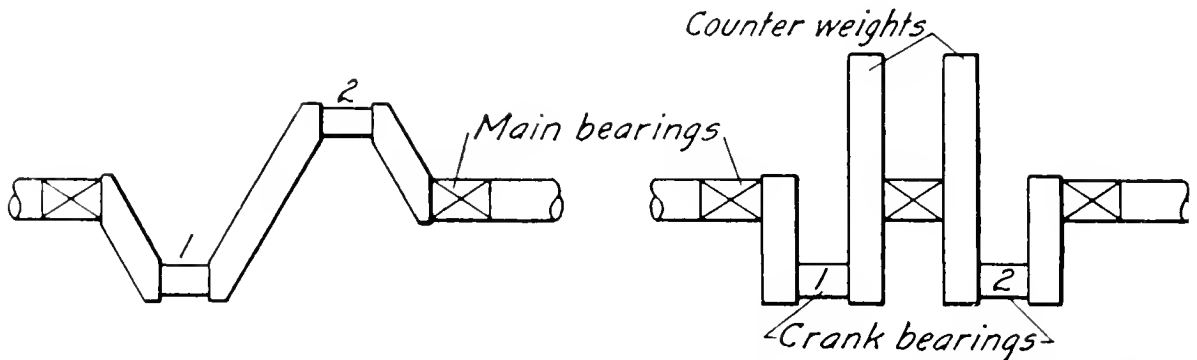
Two types of two-cylinder crank shafts. At the left the cranks are 180° apart, at the right 360° apart.
